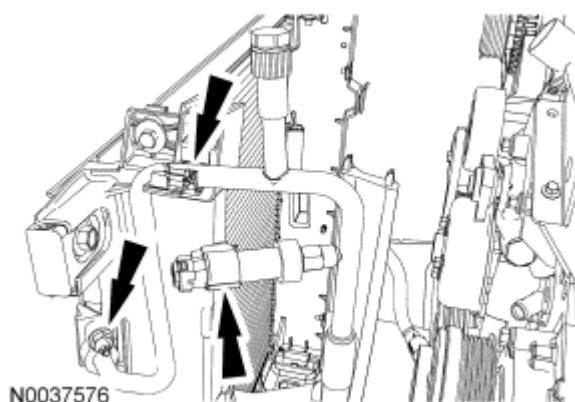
Locating A/C High Pressure Switch With Nut And Retaining Clip
